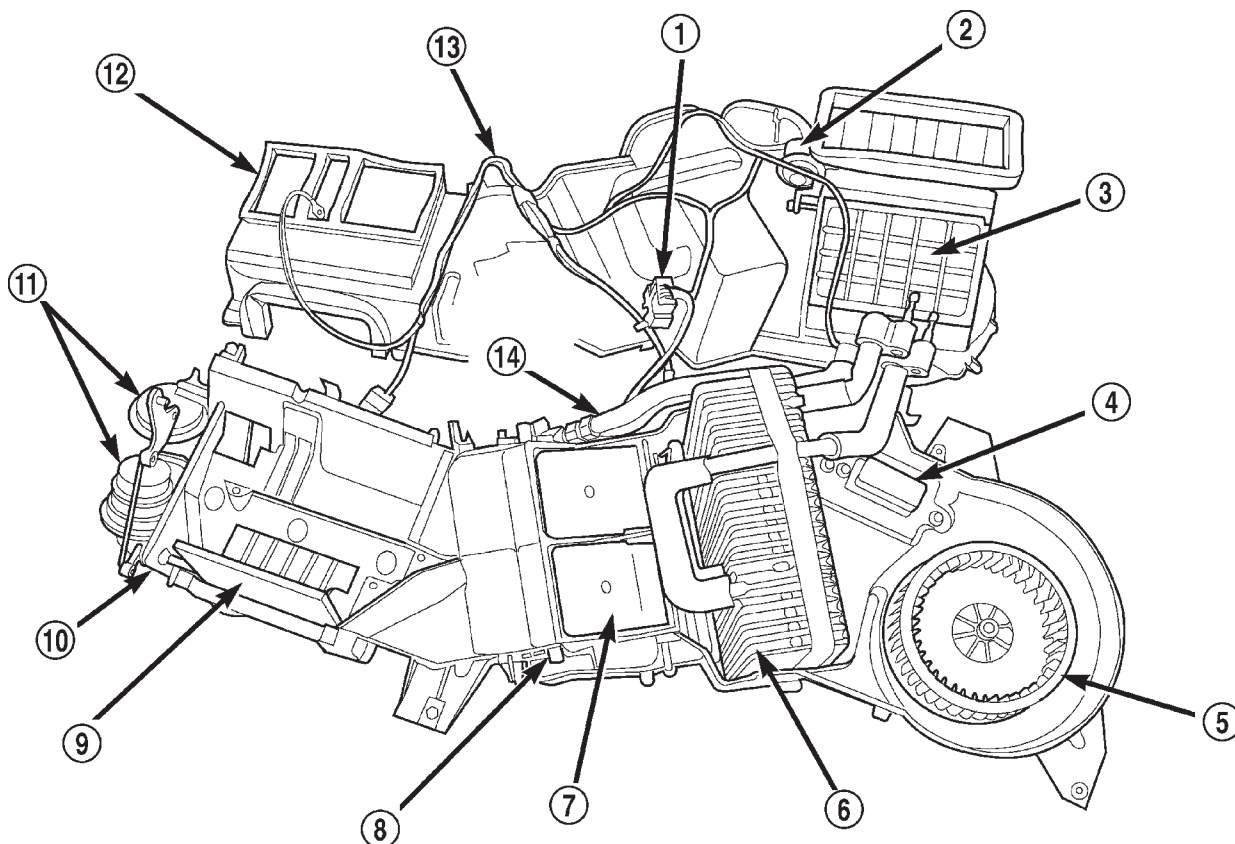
UPPER AND LOWER HVAC HOUSING-SEPARATED
